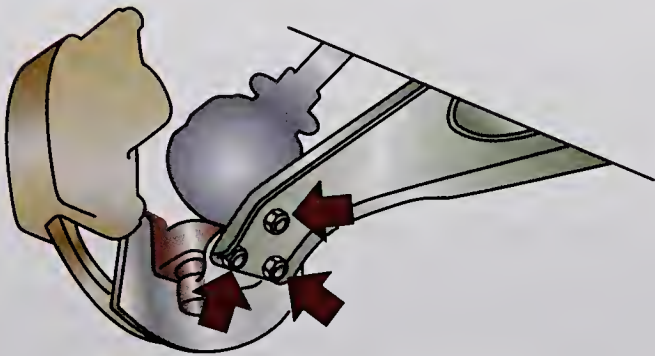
Removing nuts from lower ball joint mounting bolts under the lower control arm.
